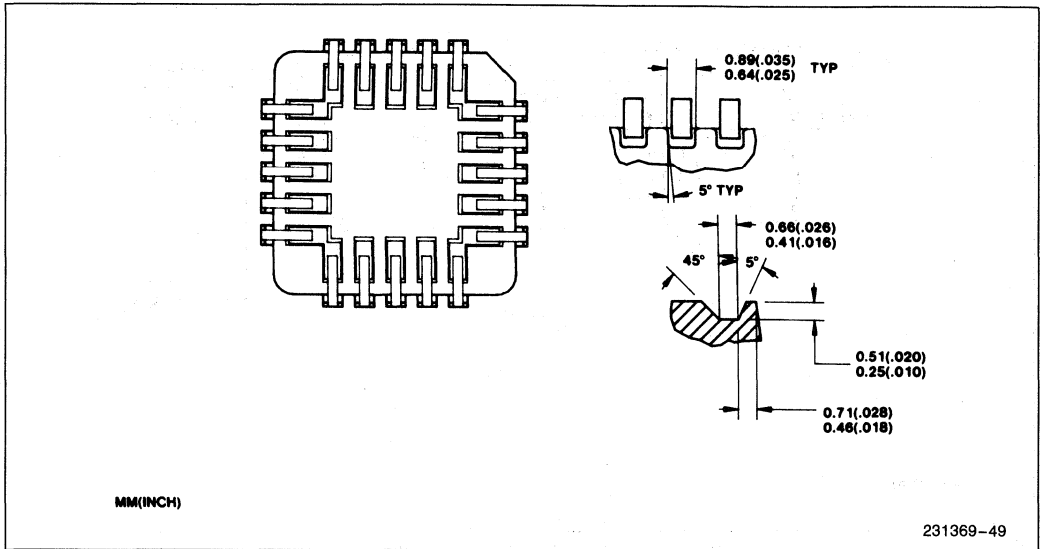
B. Standard Package Bottom View (Tooling Option II.)
